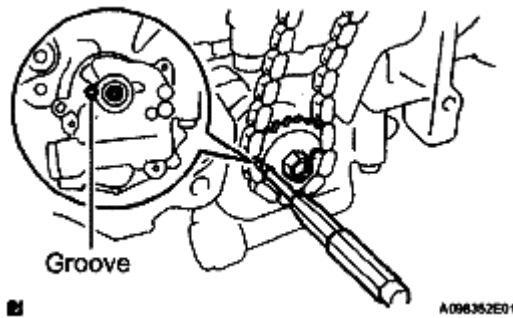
Inserting 4 mm Diameter Bar Into Adjusting Hole To Lock Gear In Position
